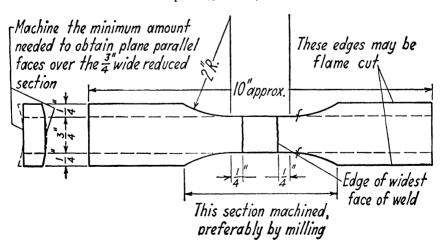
Reduced Section tension specimen (Pipe). The end view is shown on the left
